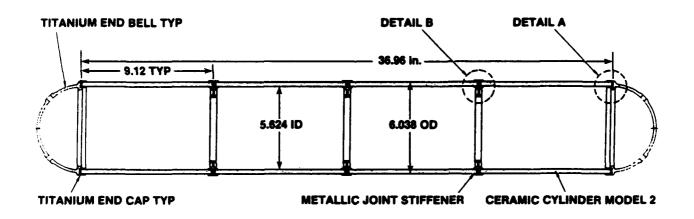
Joint stiffened ceramic housing assembly; Type W; 4 cylinder sections Mod 2.
